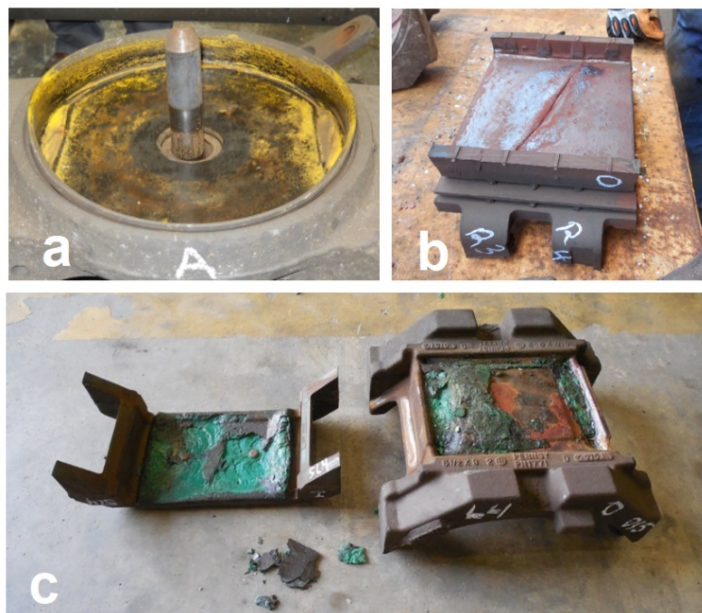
a) Worn center bowl liner; b) cracked adapter pad; c) delaminating adapter pad
